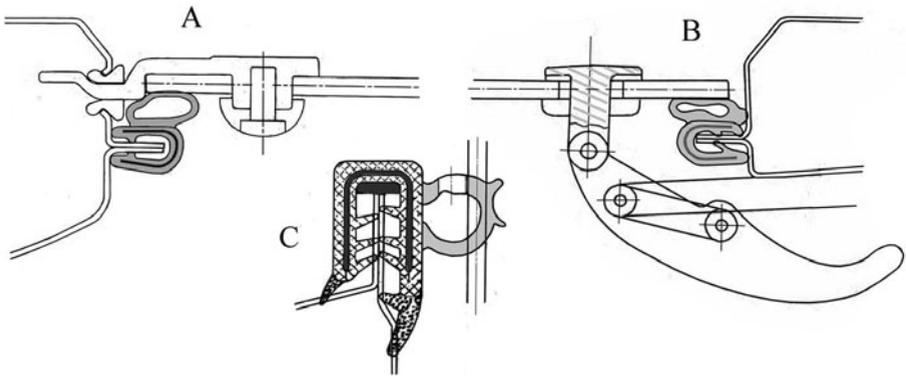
Examples of weather strips for pivoting window. A: glass hinge zone; B) opening clip handle zone; C) side zone.
